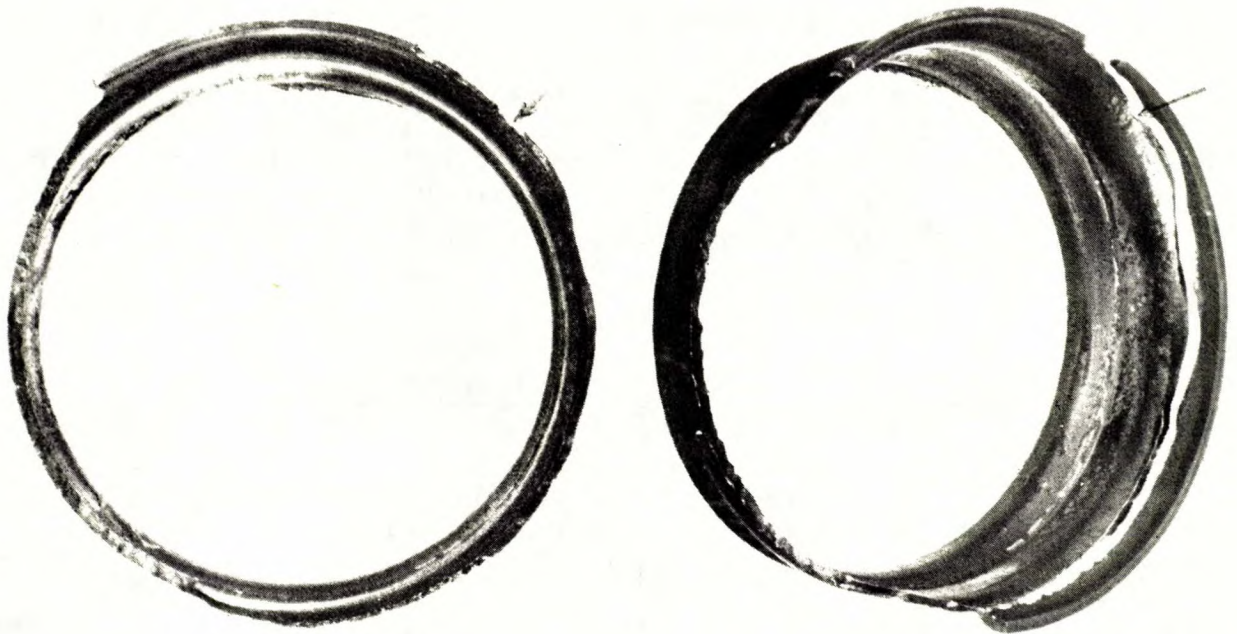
Fracture in collector pipe for No. 9 cylinder with arrow indicating location where fracture probably originated. This location is just under the edge of the ring clamp when assembled. The fracture progressed clockwise at the bend, longitudinally to the line which marked the location of the edge of the internal fitting, then continued circumferentially to failure.
